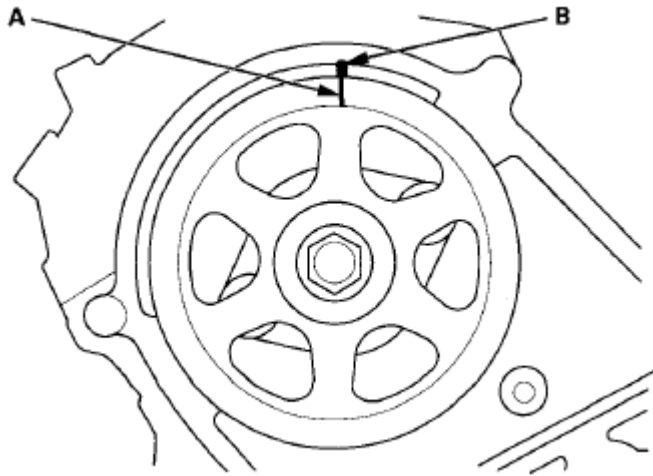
Identifying TDC Marks And Pointers On Camshaft Pulley - Rear
